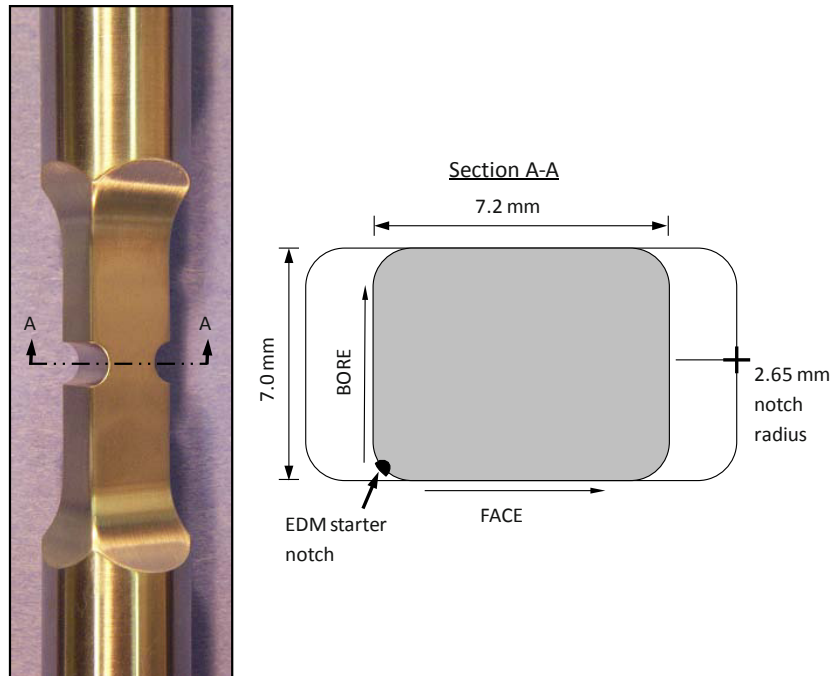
Image of specimen and machine drawing of specimen geometry in region-of-interest.
